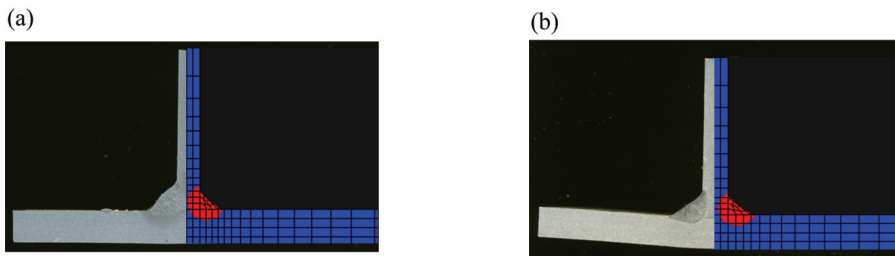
Macro-section of fillet welding T-joints (a) SS400, (b) SUS304
